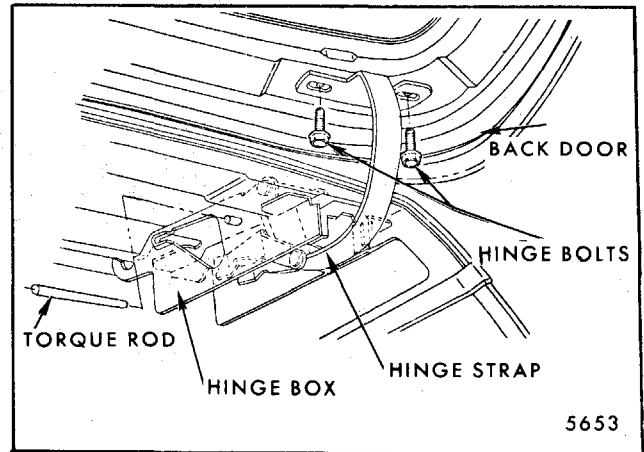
Back Door Hinge Attachment - "H-15" Styles
